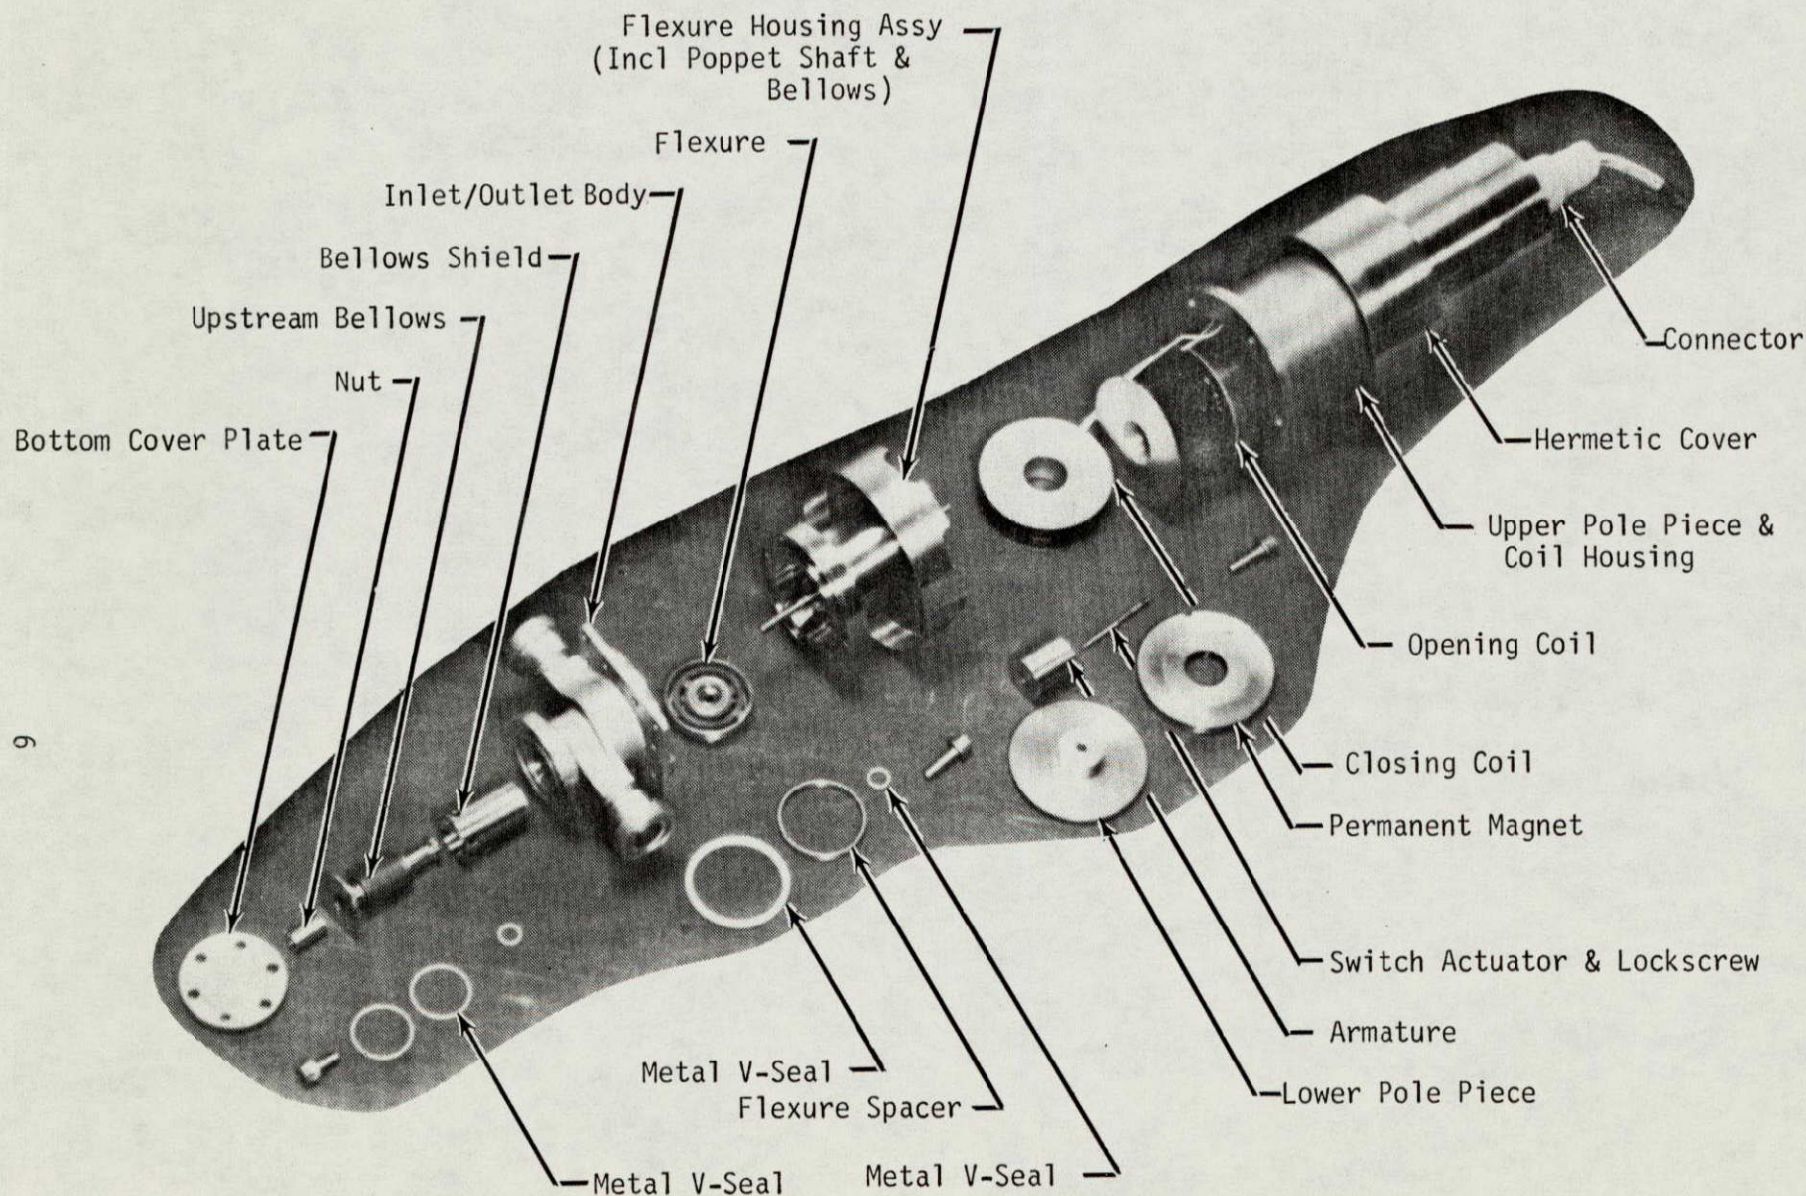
X34100  $\text{LF}_2$  LATCH VALVE ASSEMBLY - EXPLODED VIEW
